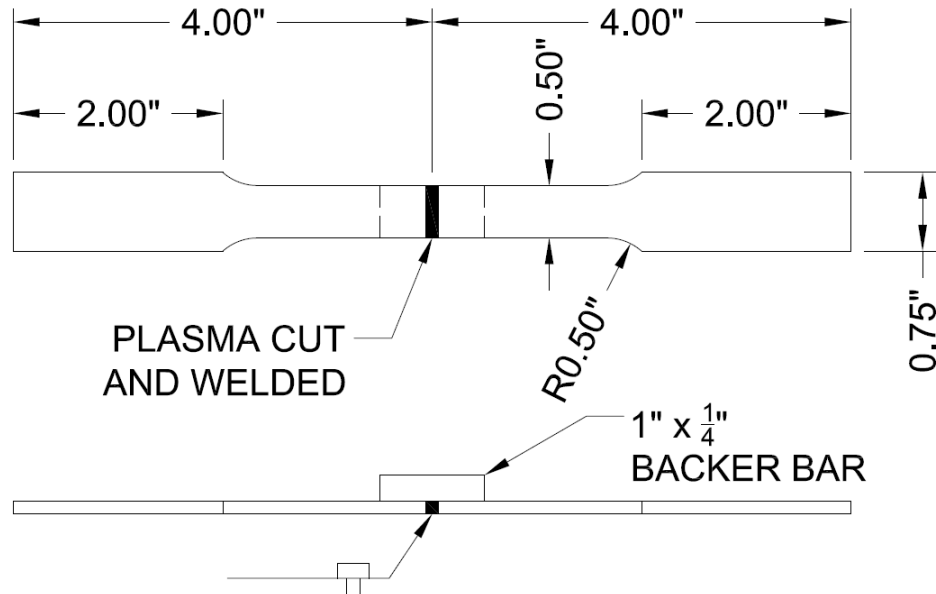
Example coupon detail for welded test specimens.
